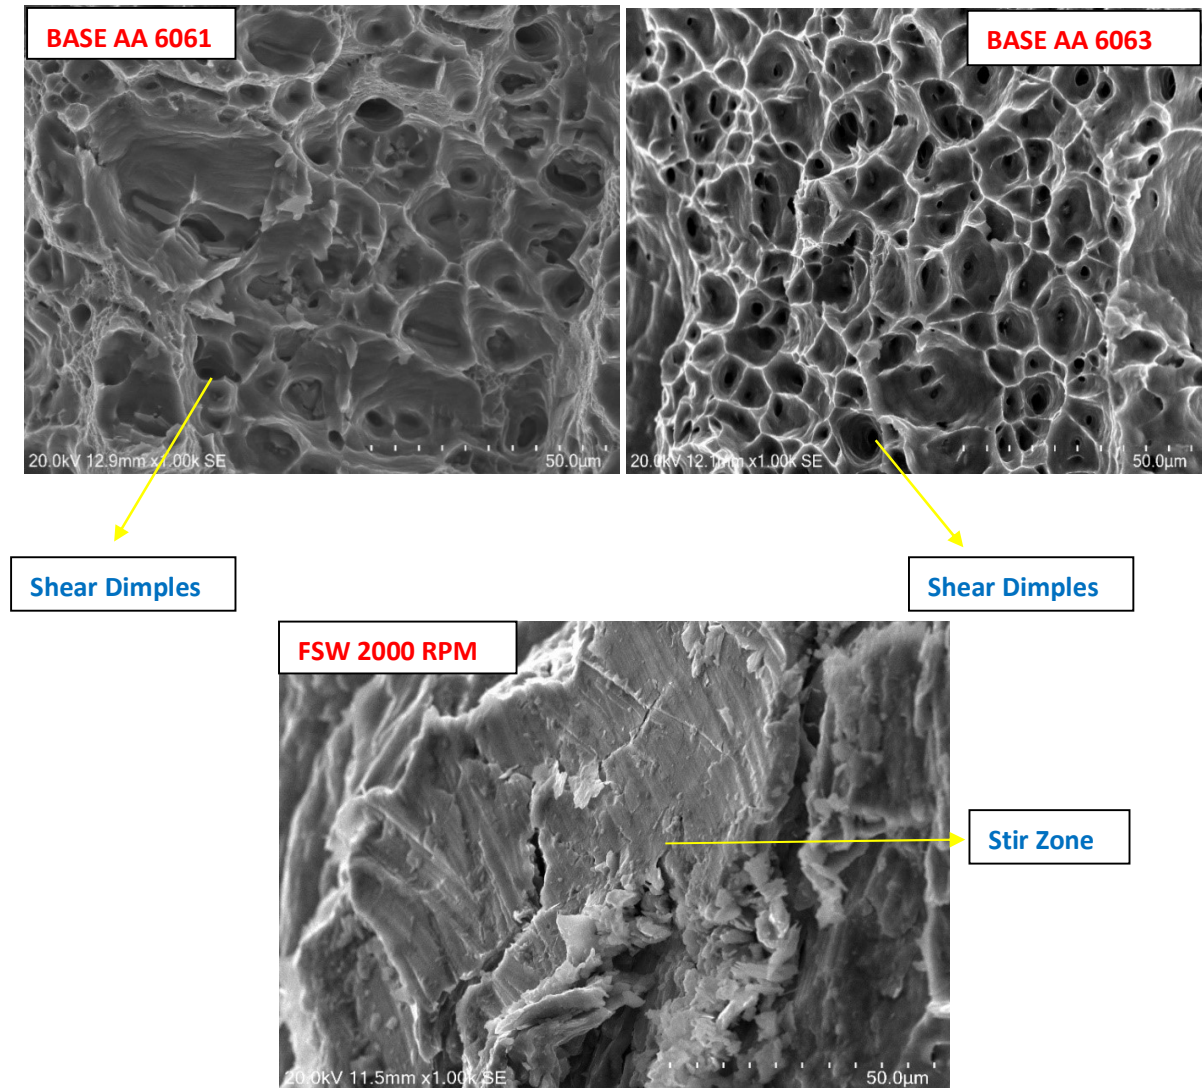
Tensile Fractography Base AA 6061, AA 6063 and Friction Stir welded sample with various Tool Rotation at 1000 X magnification.
